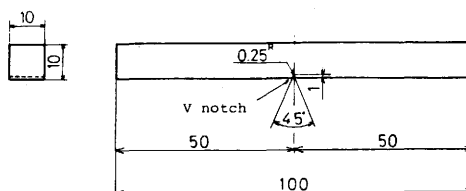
Specimen of Charpy impact test for dental P.M.M.A. base material (JIS No.1 type).
